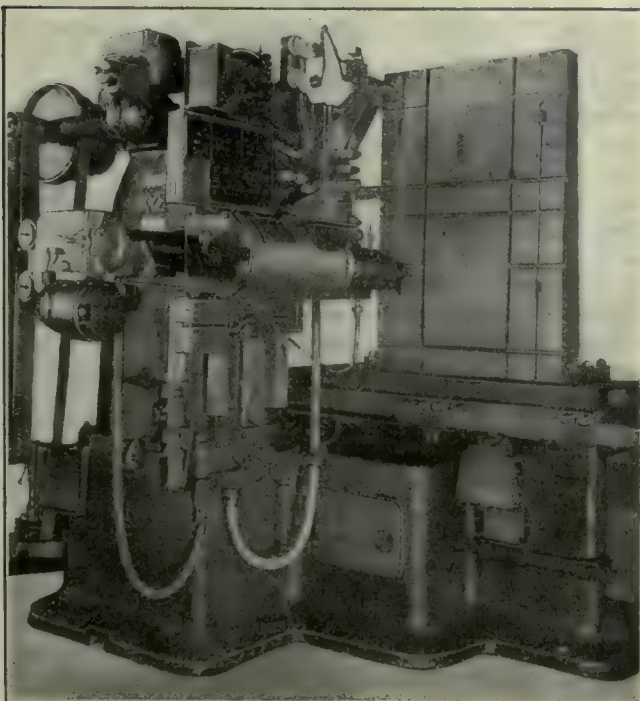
KELLER TYPE F DIE-SINKING MACHINE
